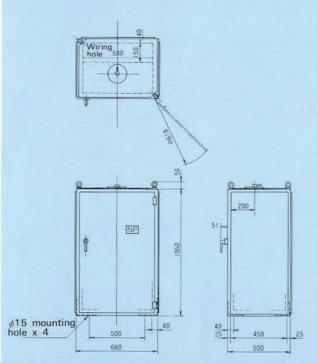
External Dimensions of CSM-8130 and CSM-8130-E Type Motor-operated Starting Controller
